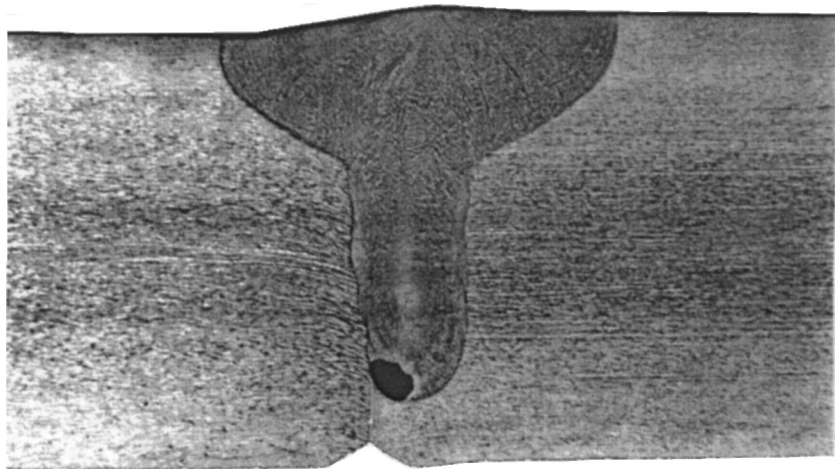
Illustration of the misalignment of the laser beam for laser butt joint welding.
